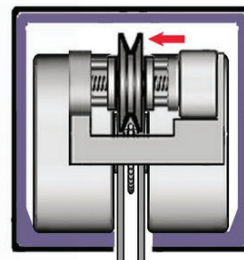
GUIDE WHEEL MOVES INTO POSITION
